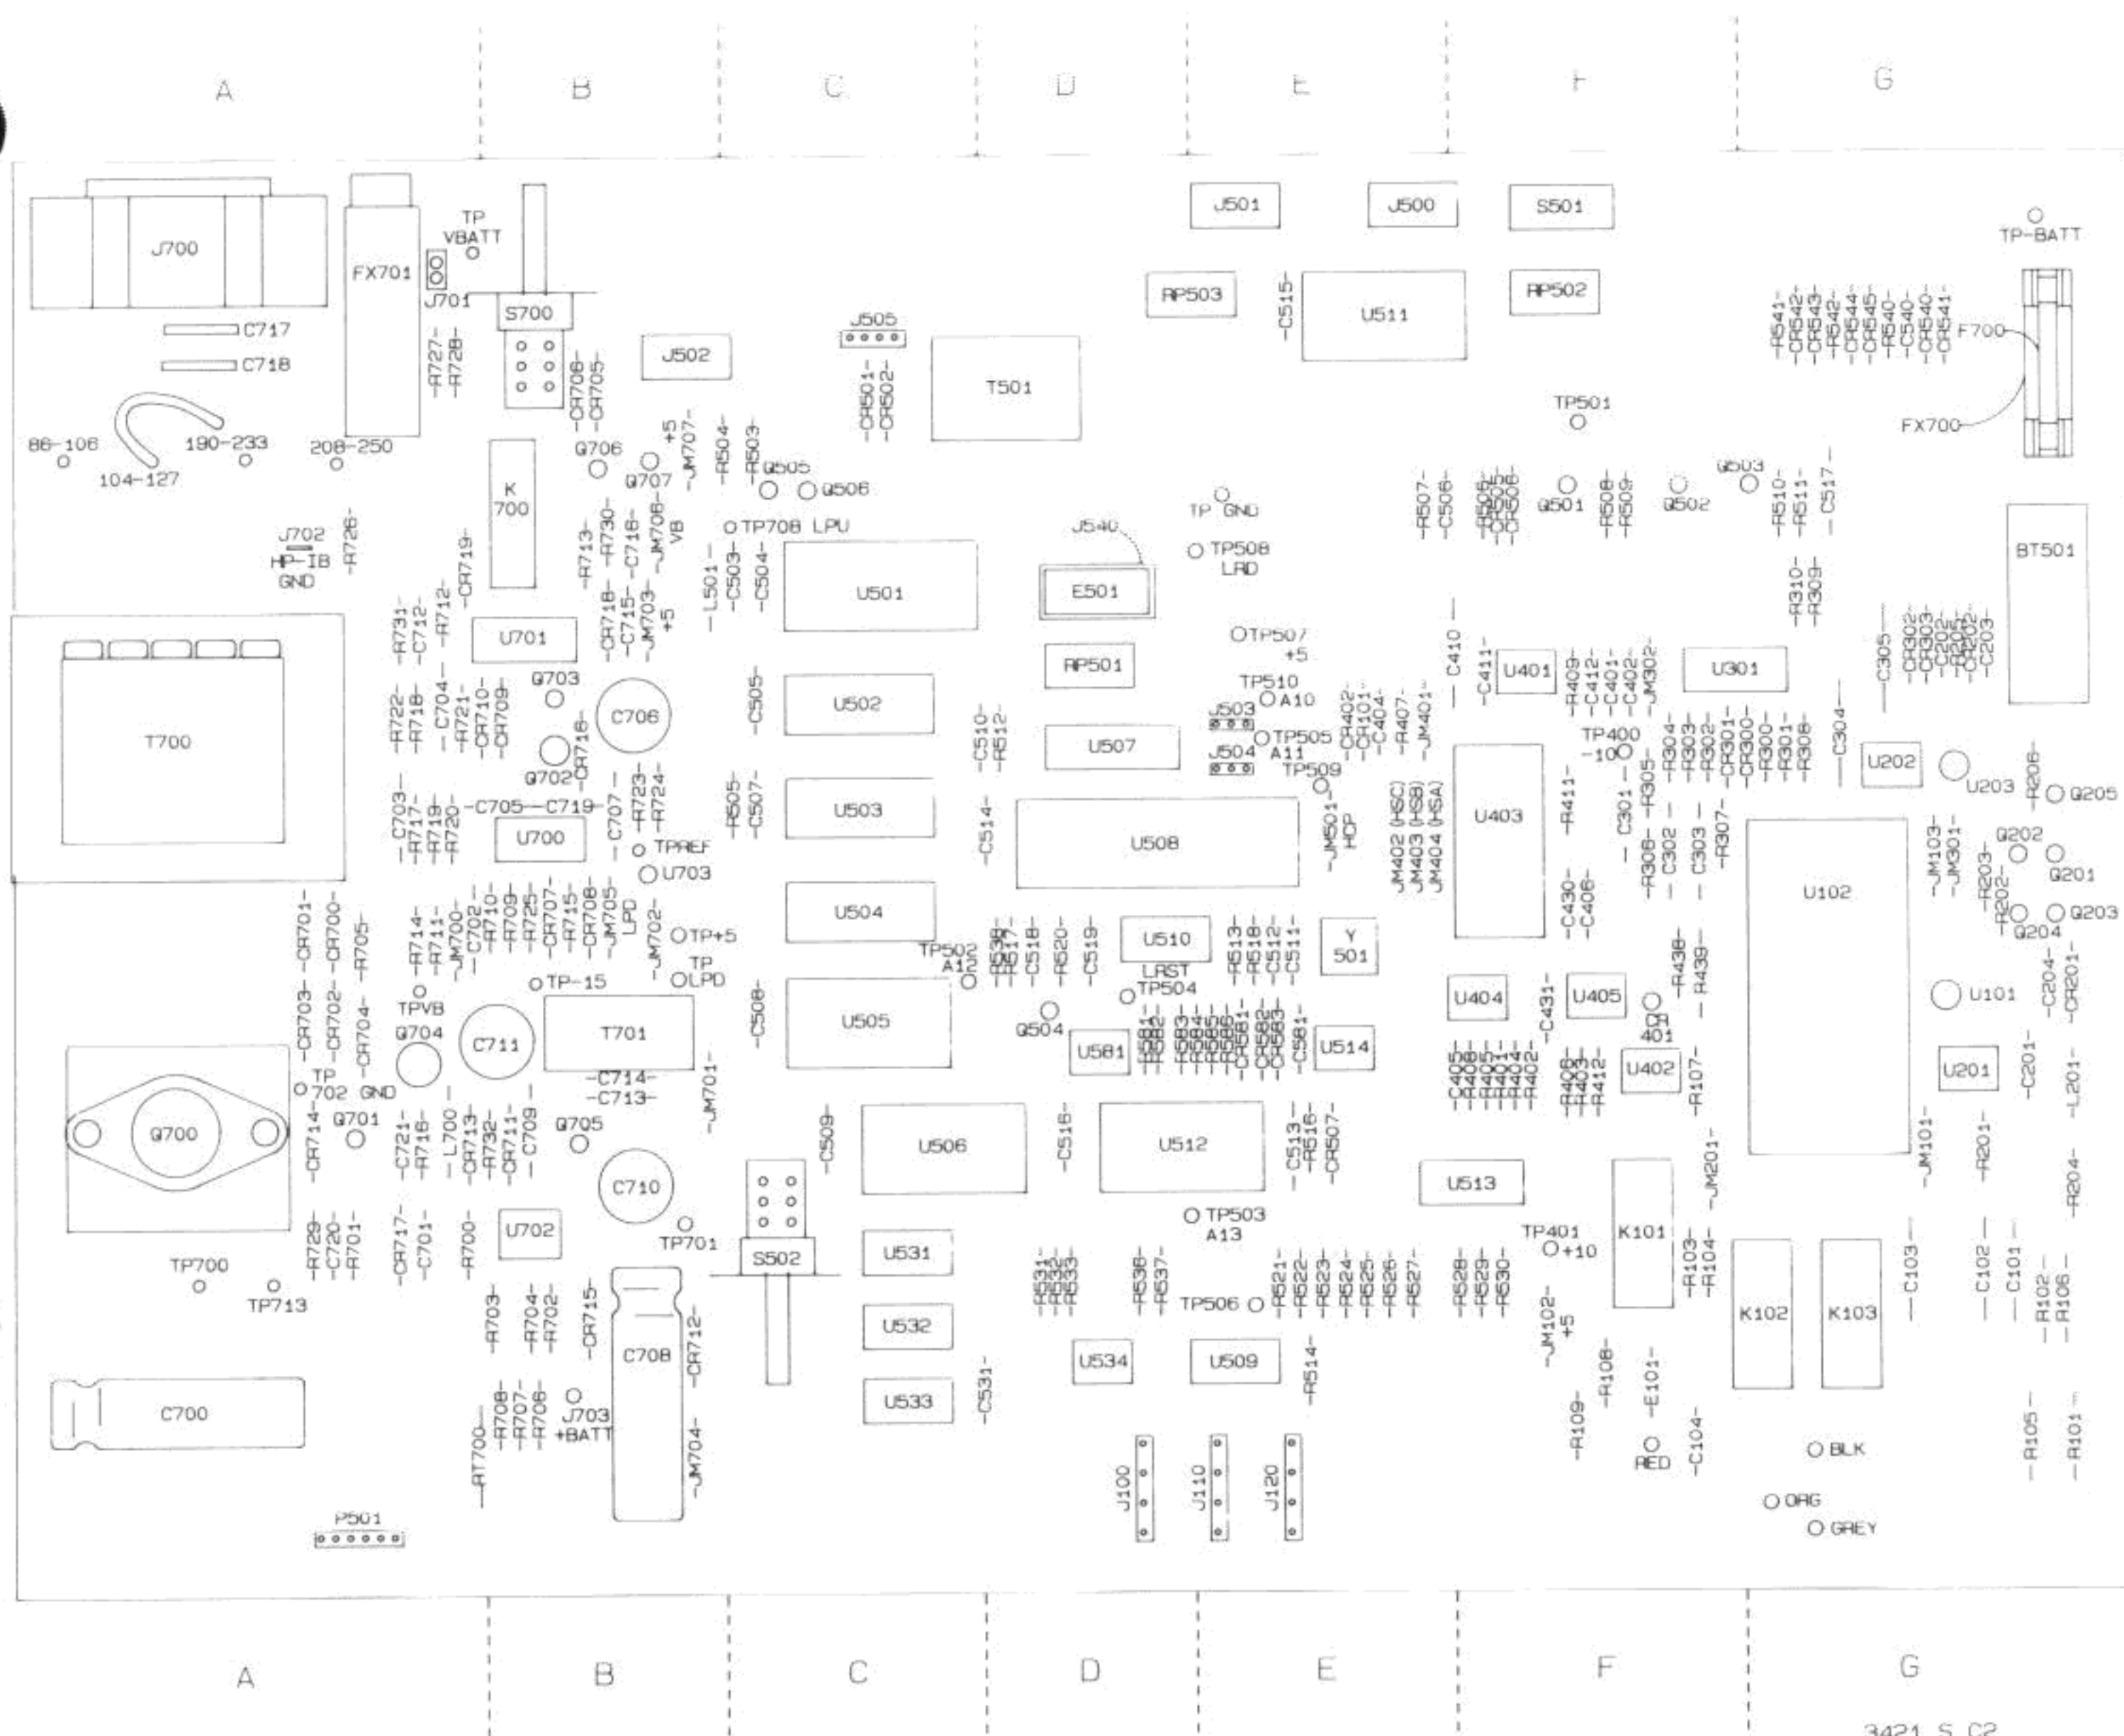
03421-66511 Component Locator (ERC 2334)
